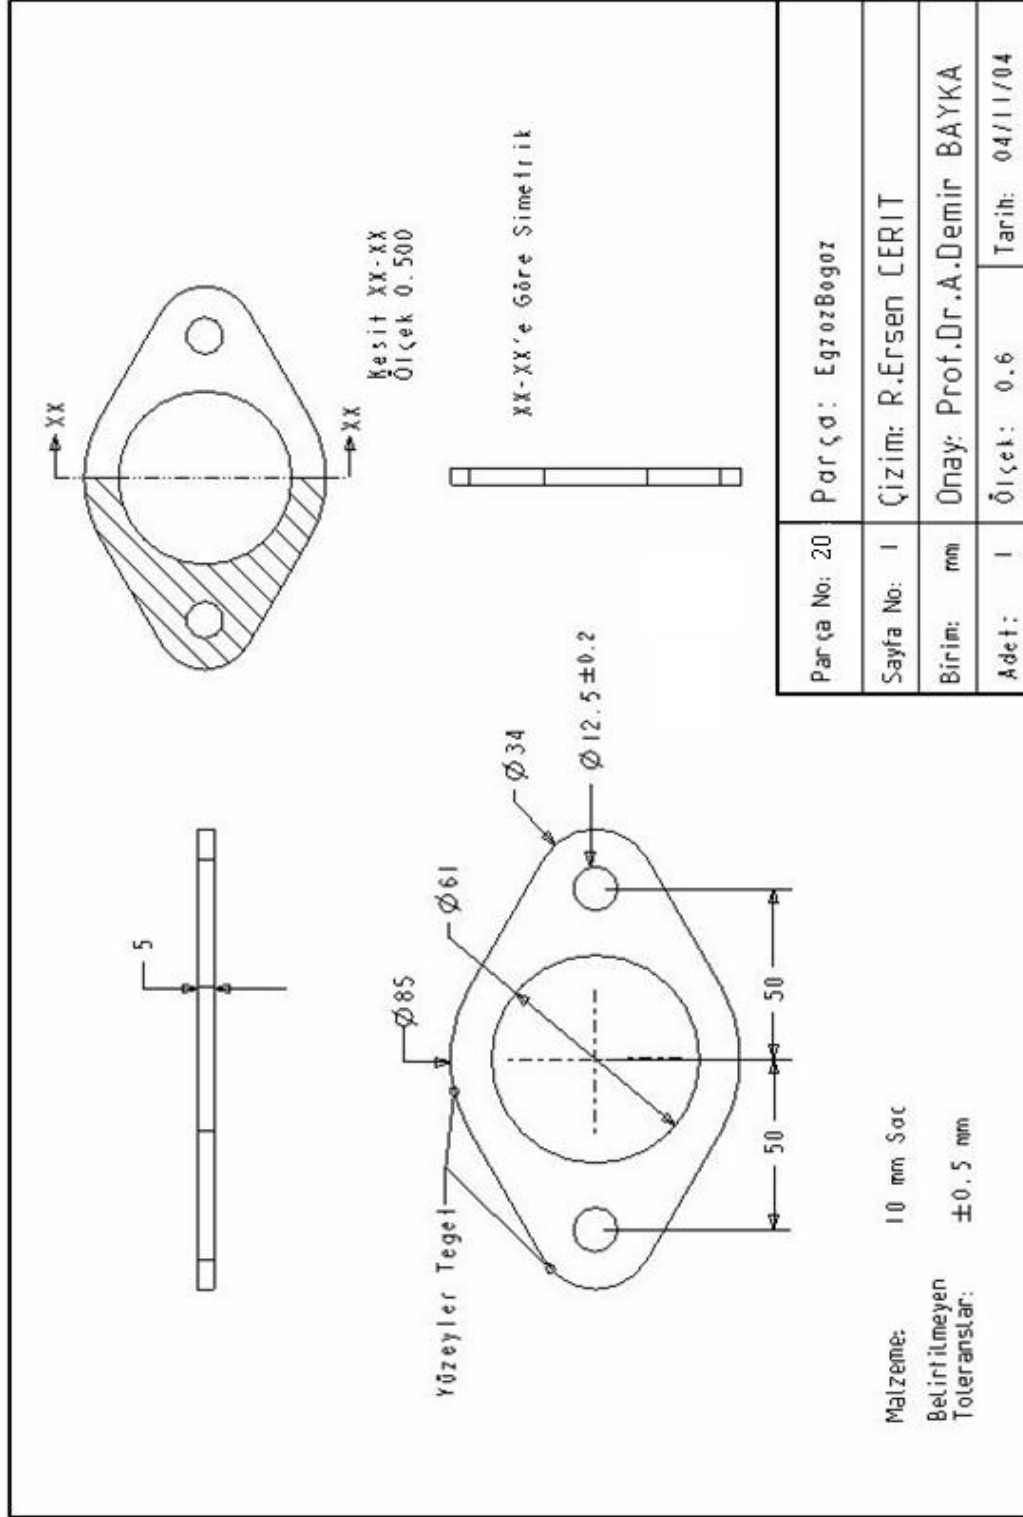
Technical Drawing of Exhaust Pipe Flange.
